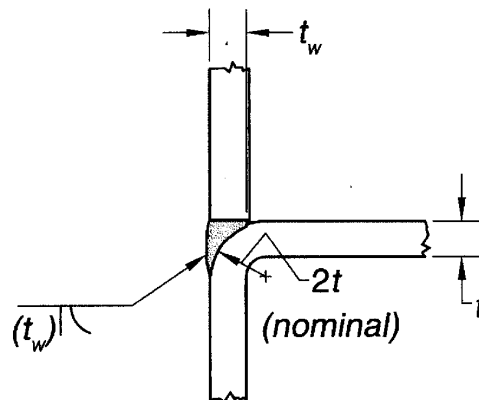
Flare bevel weld, equal width HSS weld joint.
